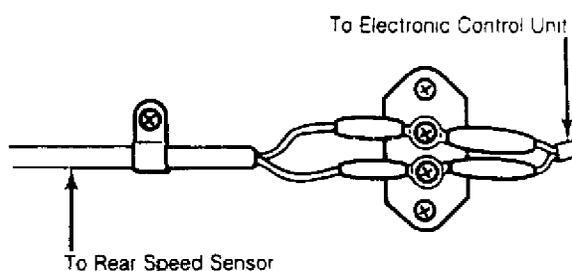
Rear Speed Sensor Harness Connector (Under Rear Seat)
